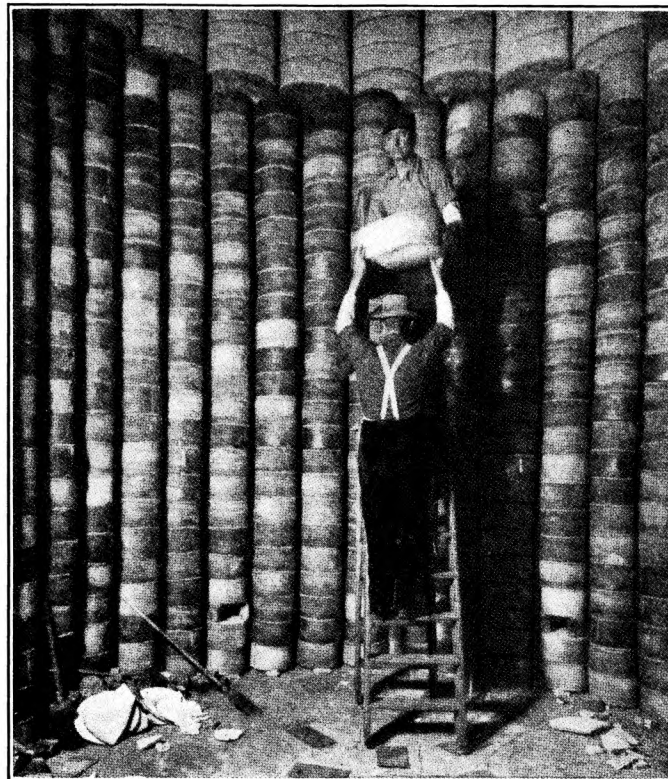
PLACERS INSIDE OF KILN SETTING SAGGERS IN PLACE. THE BOTTOM OF ONE SAGGER FORMS A TOP FOR THE ONE IMMEDIATELY BELOW
